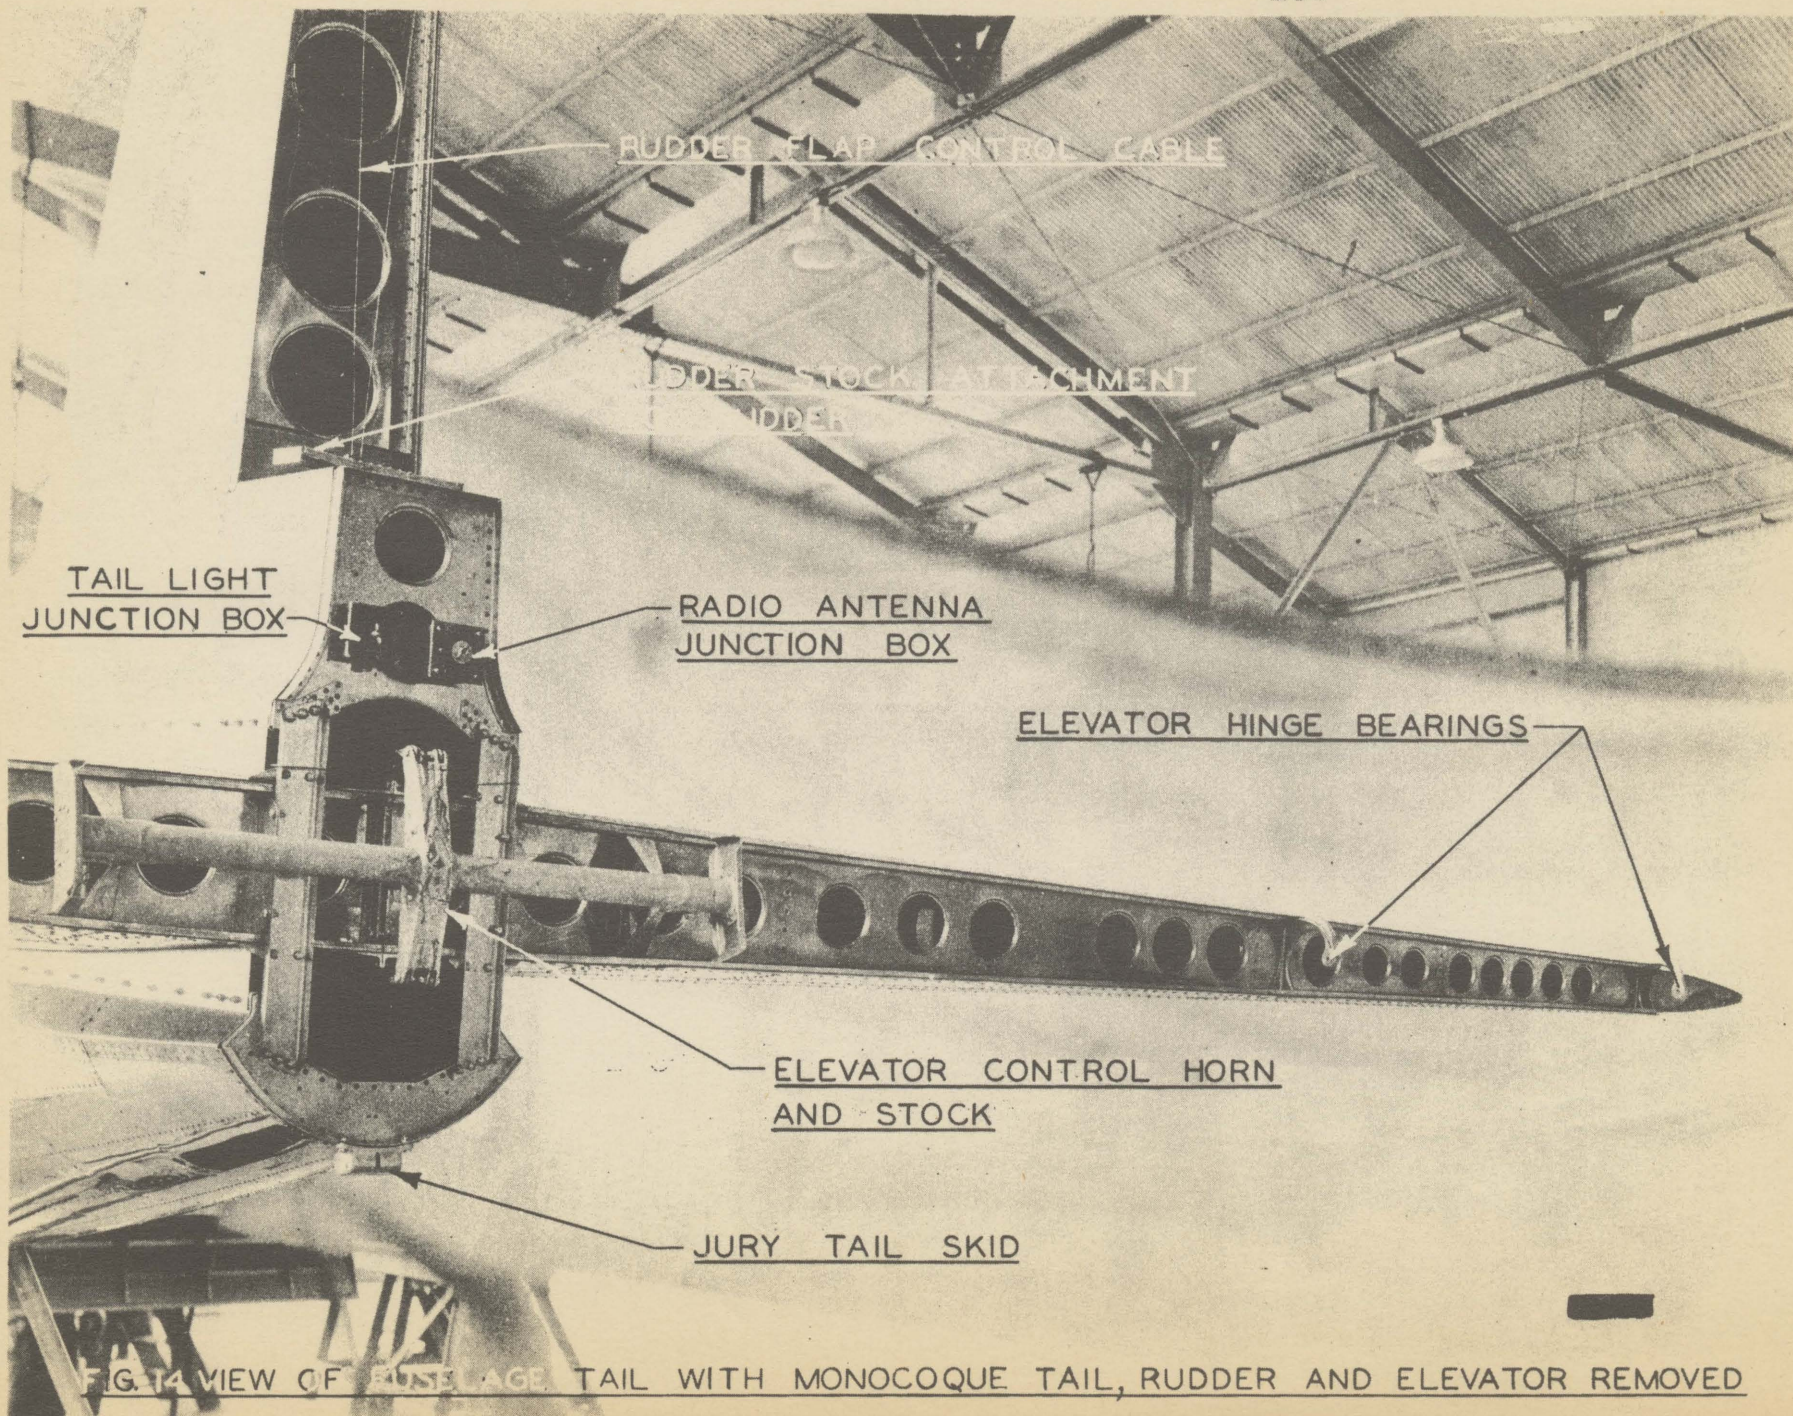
VIEW OF FUSELAGE TAIL WITH MONOCOQUE TAIL, RUDDER AND ELEVATOR REMOVED
